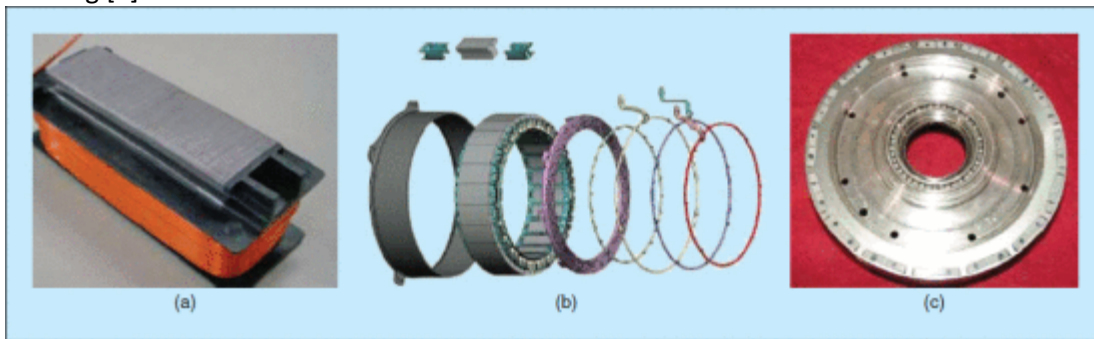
(a) The one-tooth assembly of Chevy Volt's Motor A. (b) Chevy Volt's Motor A assembly diagram. (c) Chevy Volt's Motor A rotor with the end ring removed to show the magnet arrangement [1].
